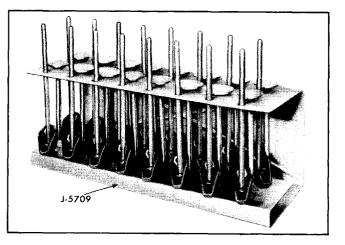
Valve and Valve Train Holding Stand J-5709
